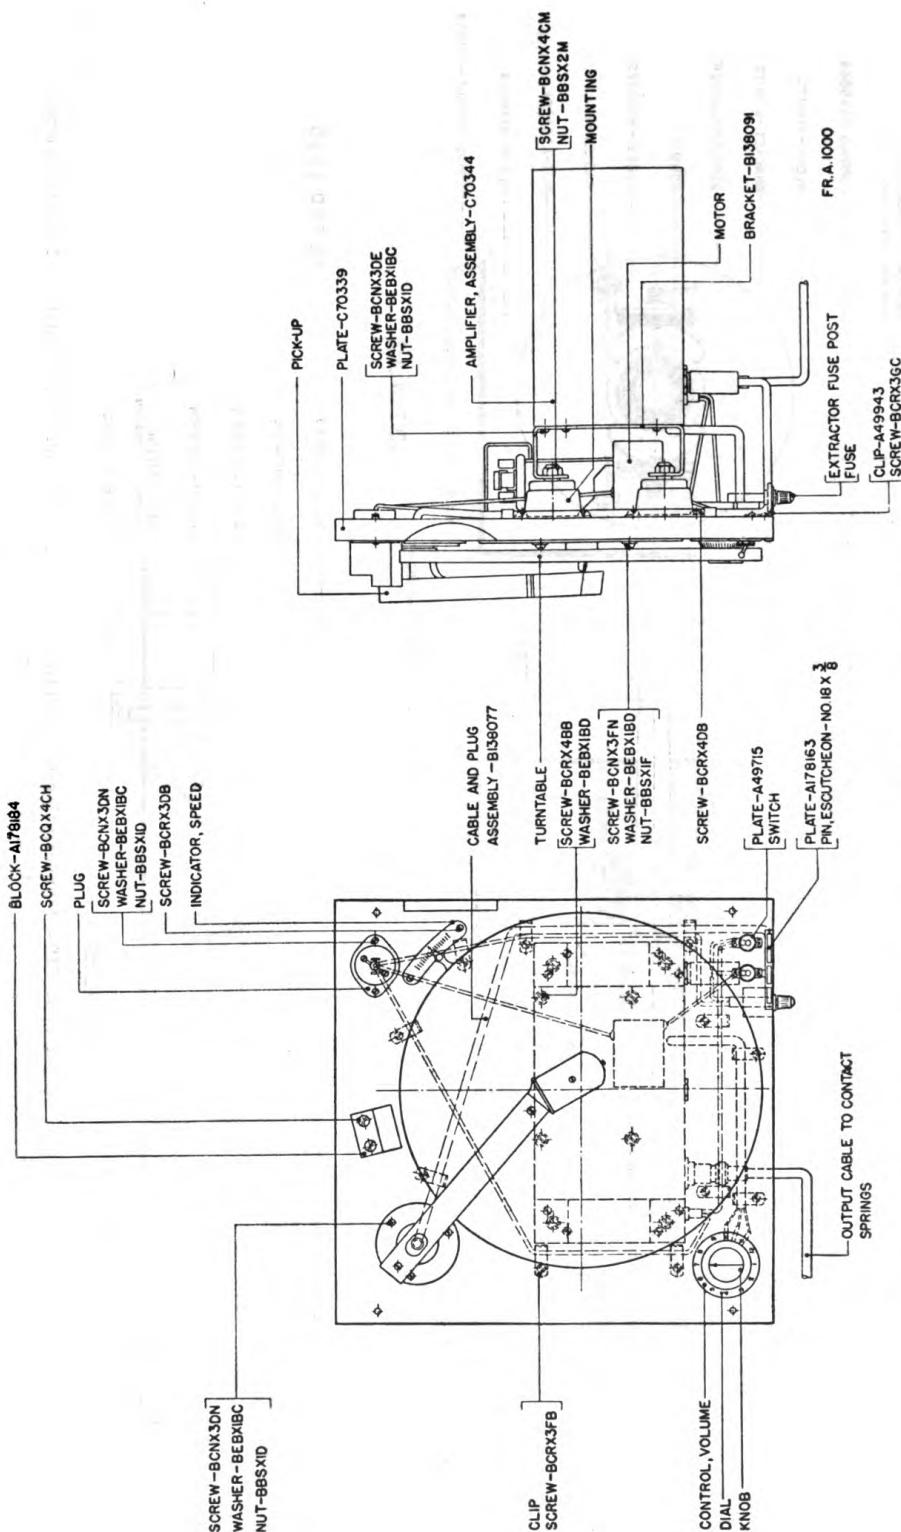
Binaural training instrument, M2—turntable, assembly, plan and side views.
